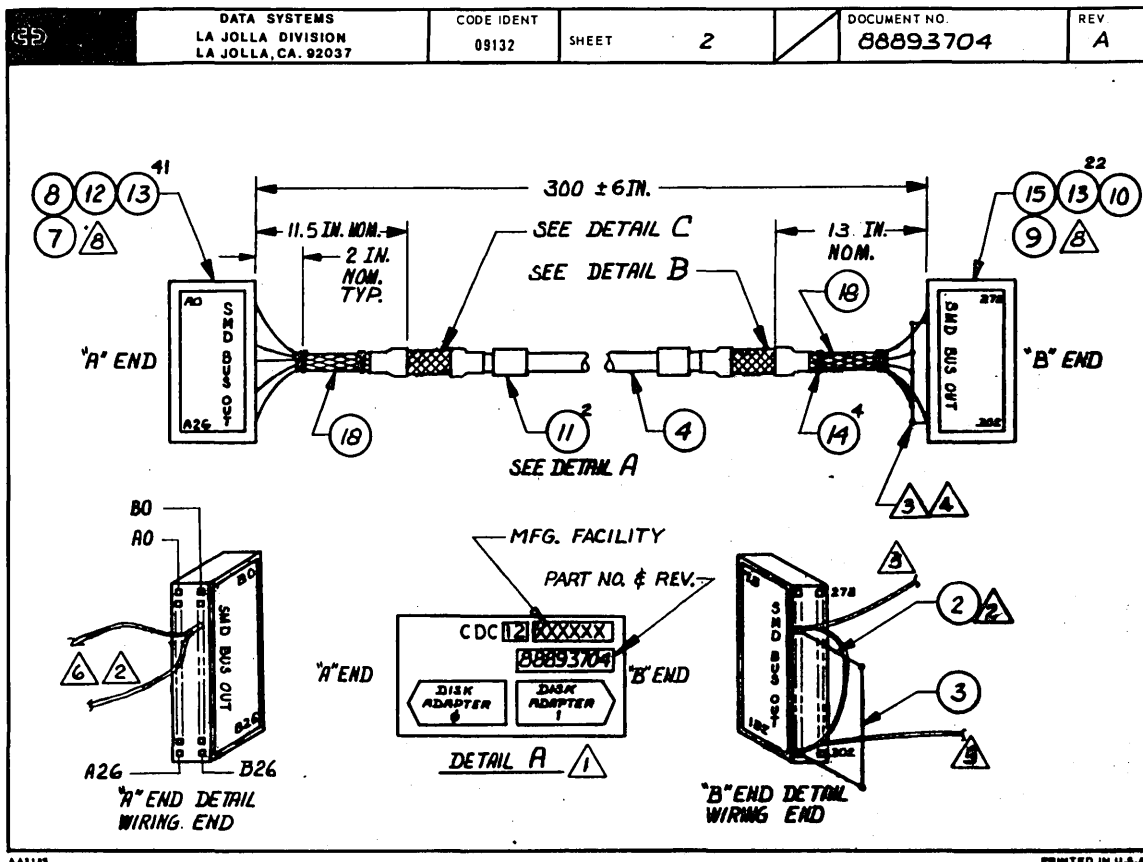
Cable Assembly - Bus Out Expansion (Sheet 1 of 5)
